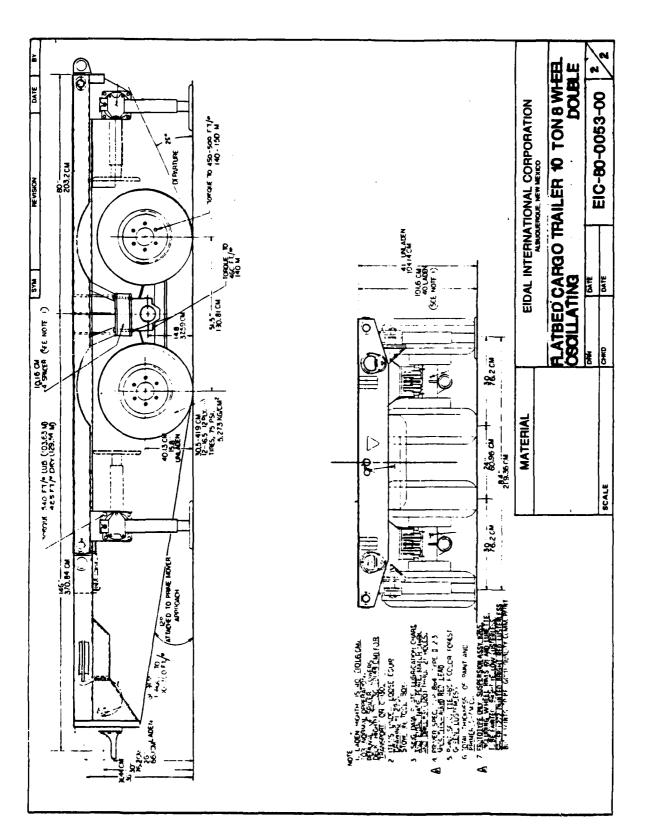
EXISTING TRAILER DESIGN, 8-WHEEL SUSPENSION
